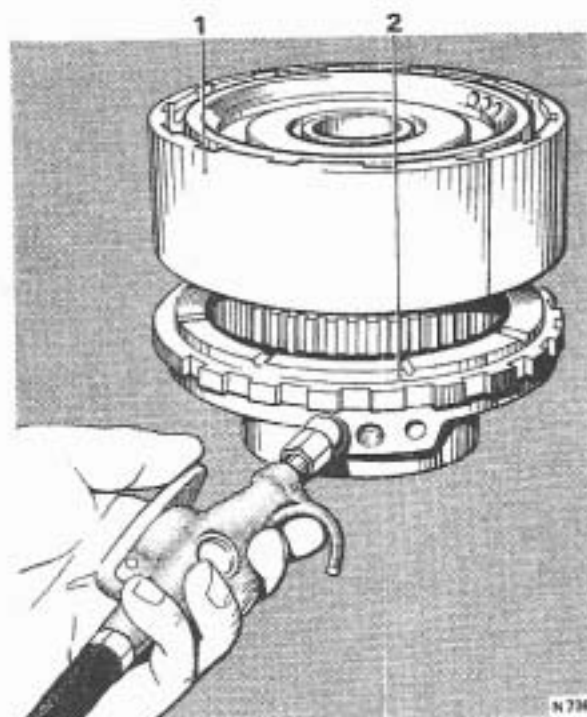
AIR TESTING THE DIRECT CLUTCH
